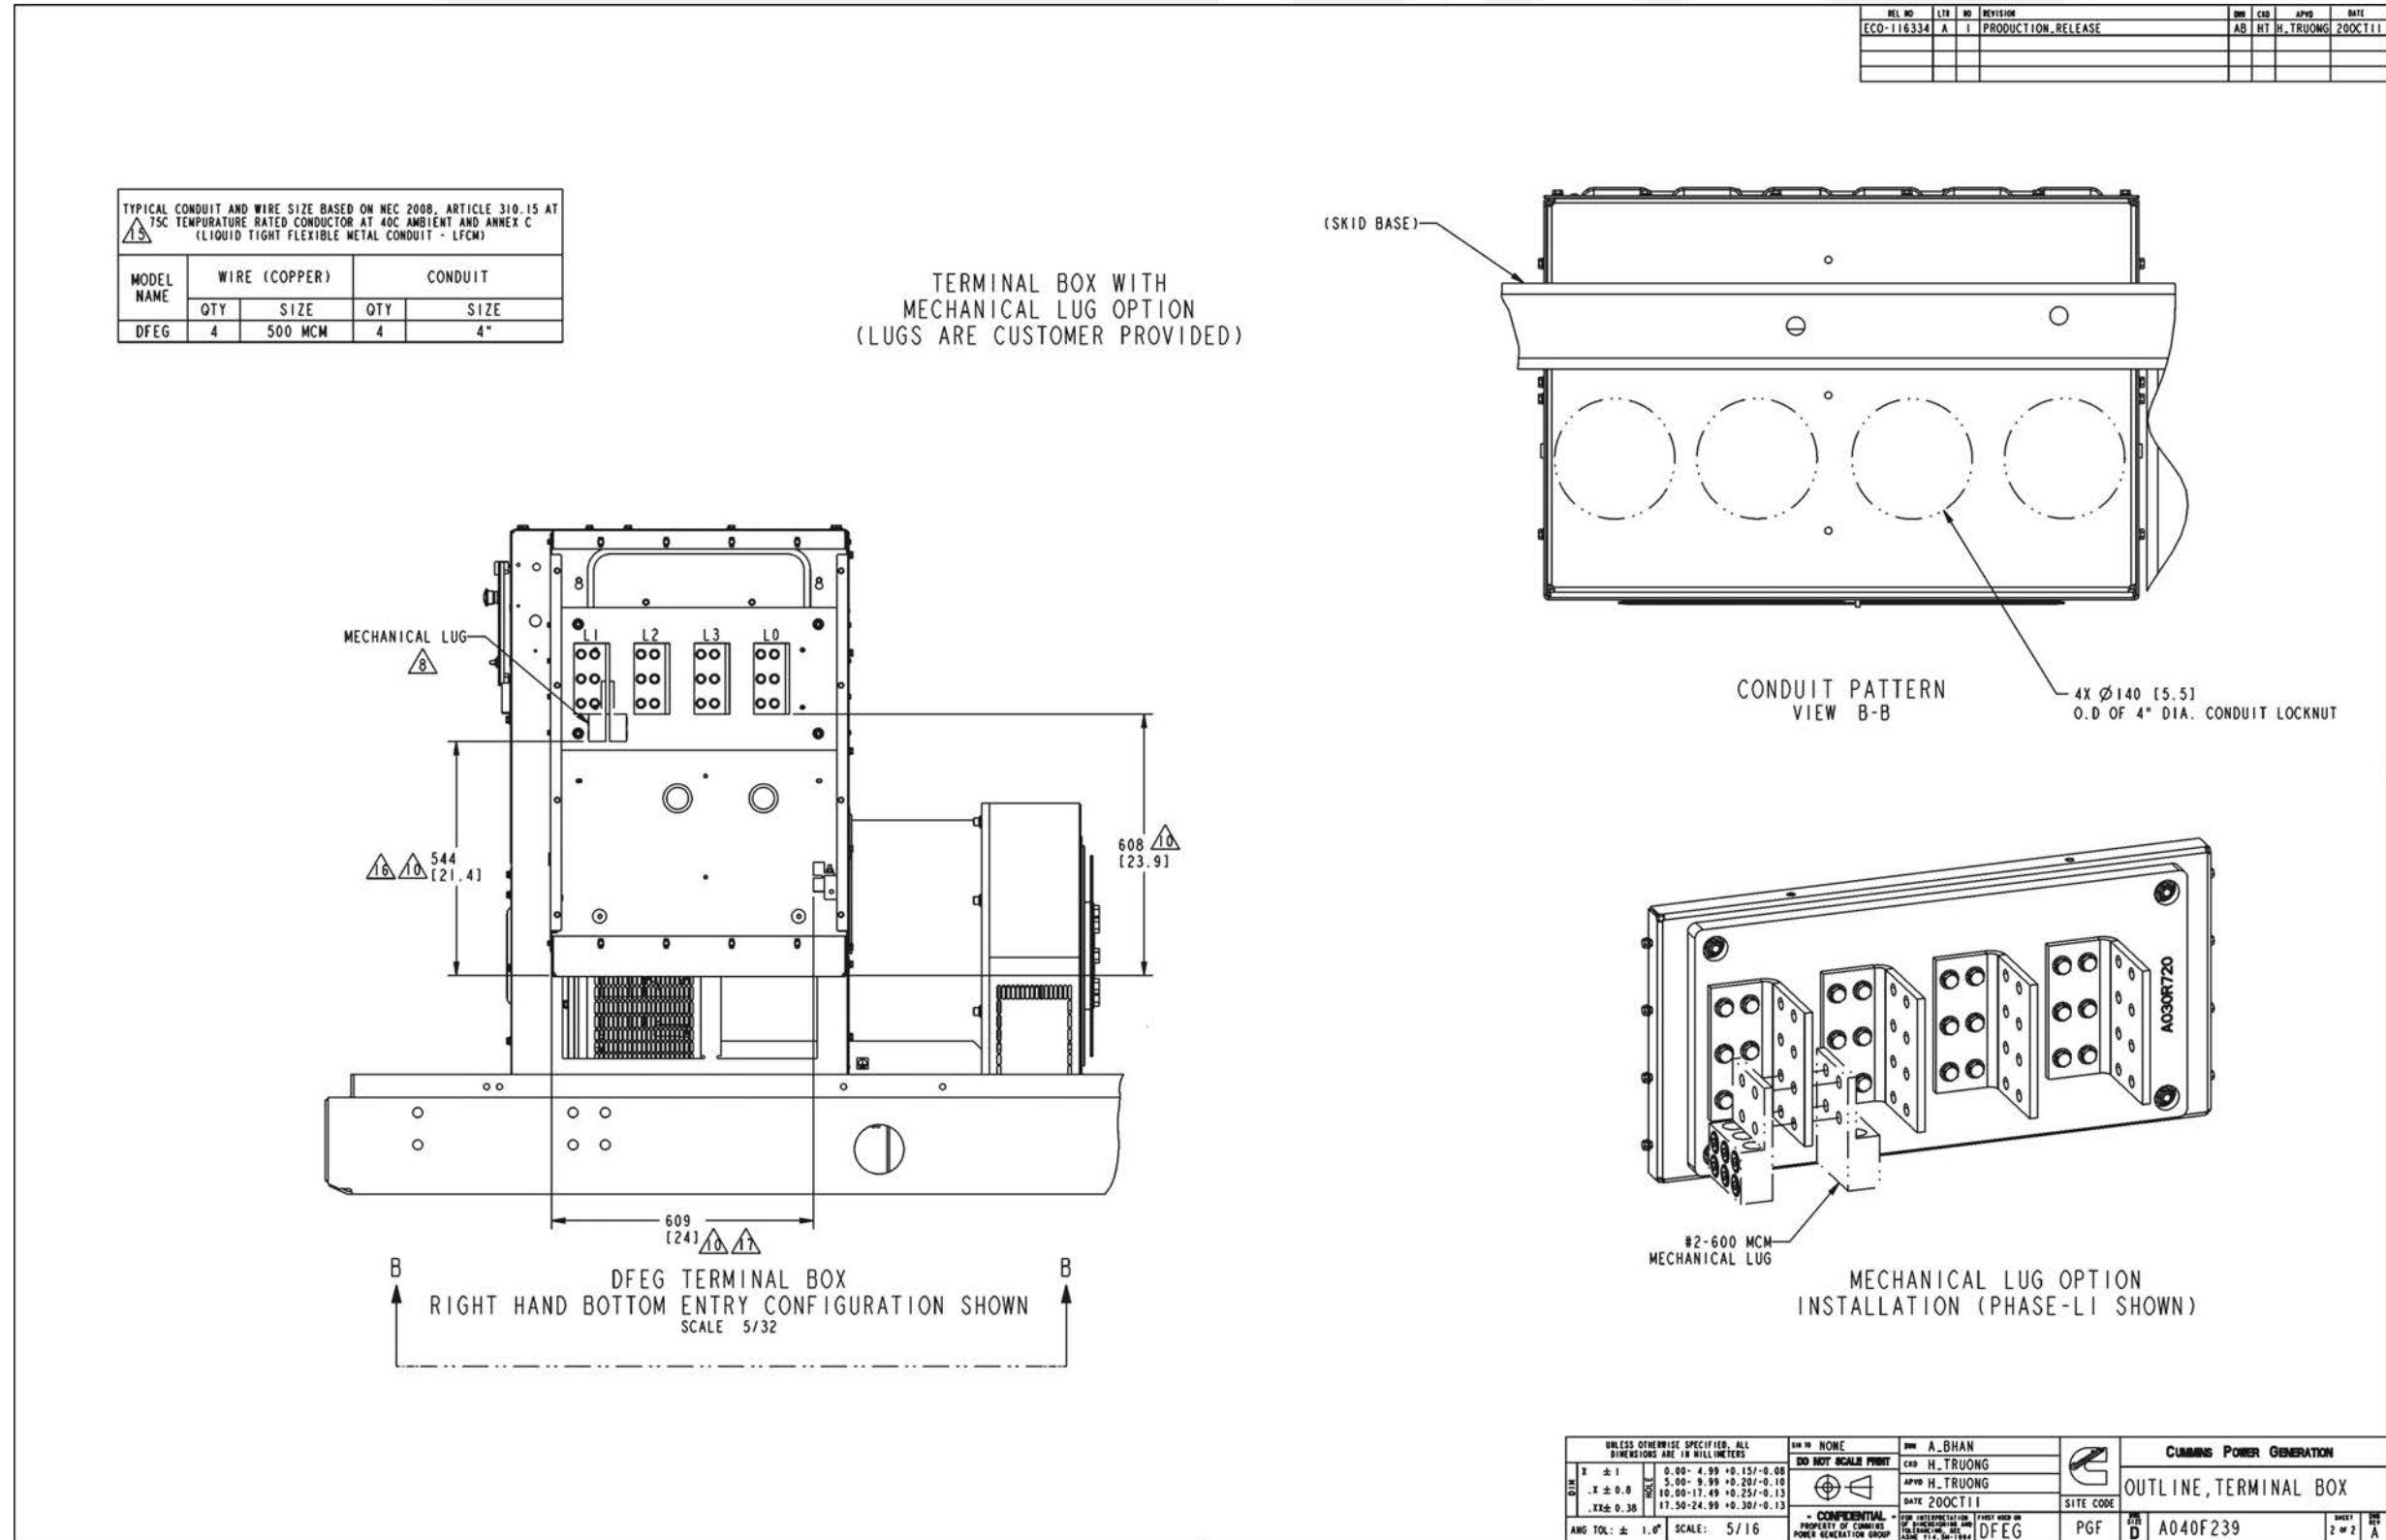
BREAKERLESS CONDUCTOR TERMINAL BOX OUTLINE DRAWING (SHEET 2)
